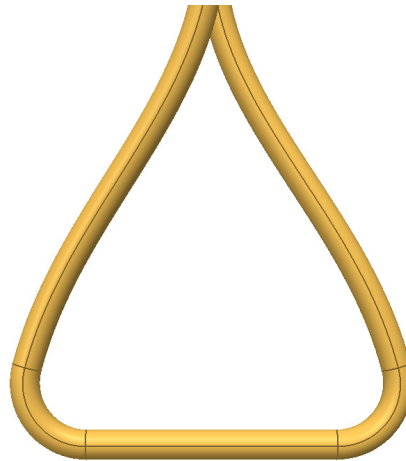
CAD drawing of the single turn coil used in this thesis
